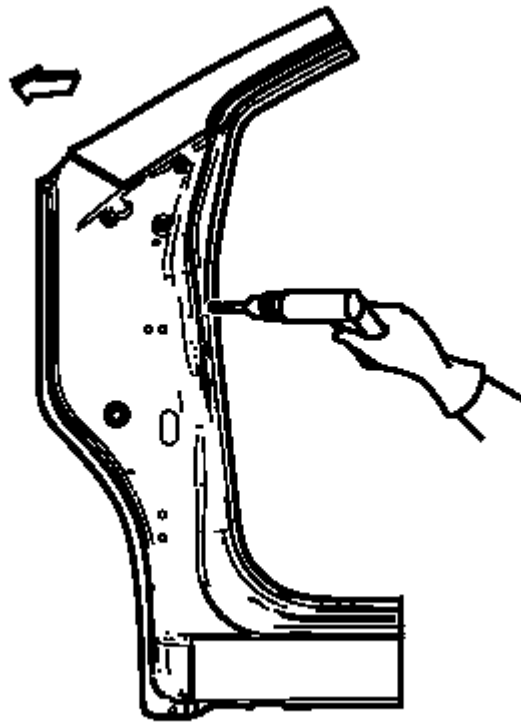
Drilling for plug welding along edges of front hinge pillar body
